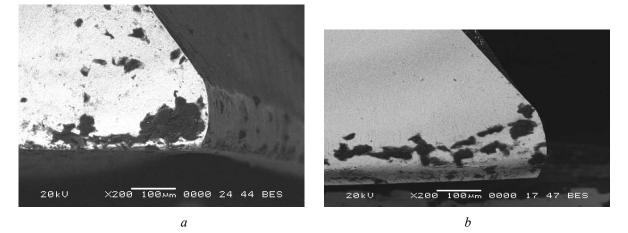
SEM-image of surface of knife shear face without coating (*a*), knife shear (No. 3) with TiN-coating (*b*), after cutting of chipboard
